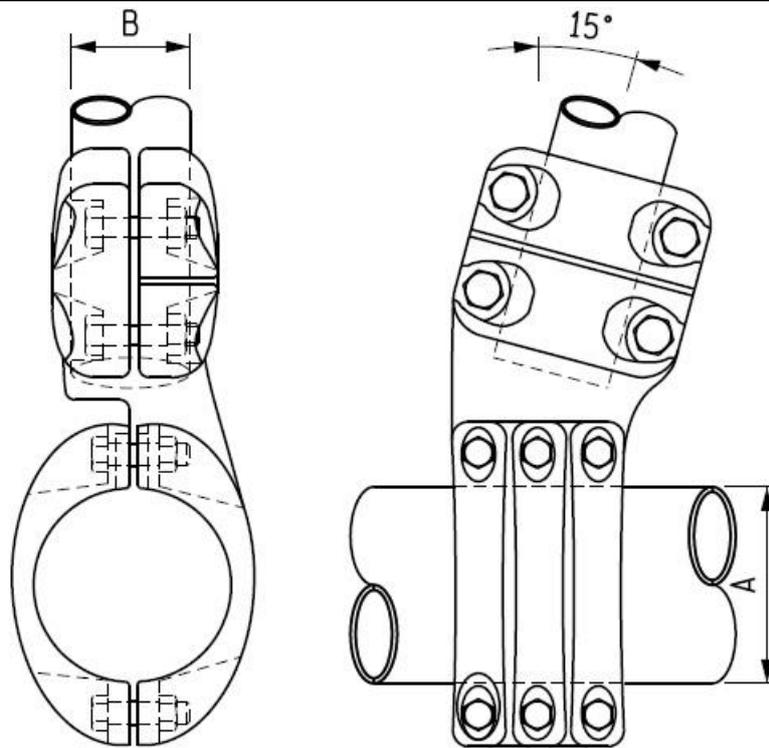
ESC-H-TT 15: Busbar Support Clamp – Horizontal - Tube-to-Tube – 15° Tap-off (D-DT-6353)
